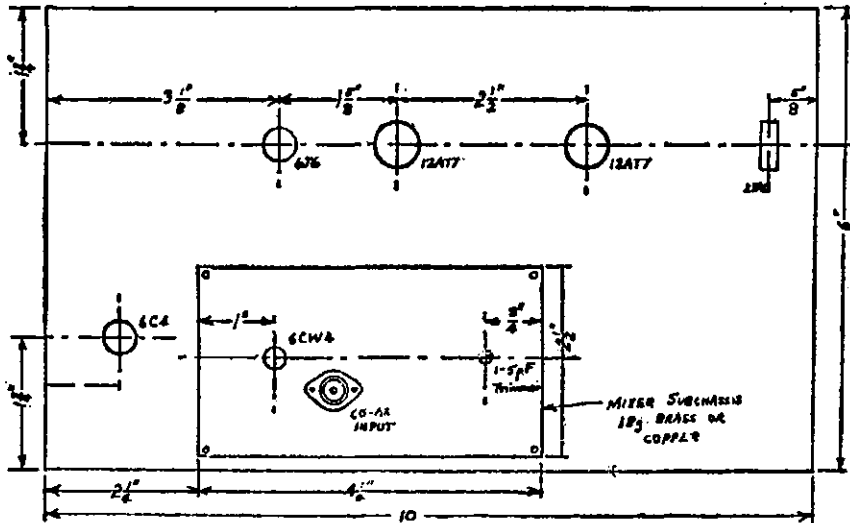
Converter Layout. Chassis: 18 gauge aluminium, 10 x 6 x 2½ inches.
